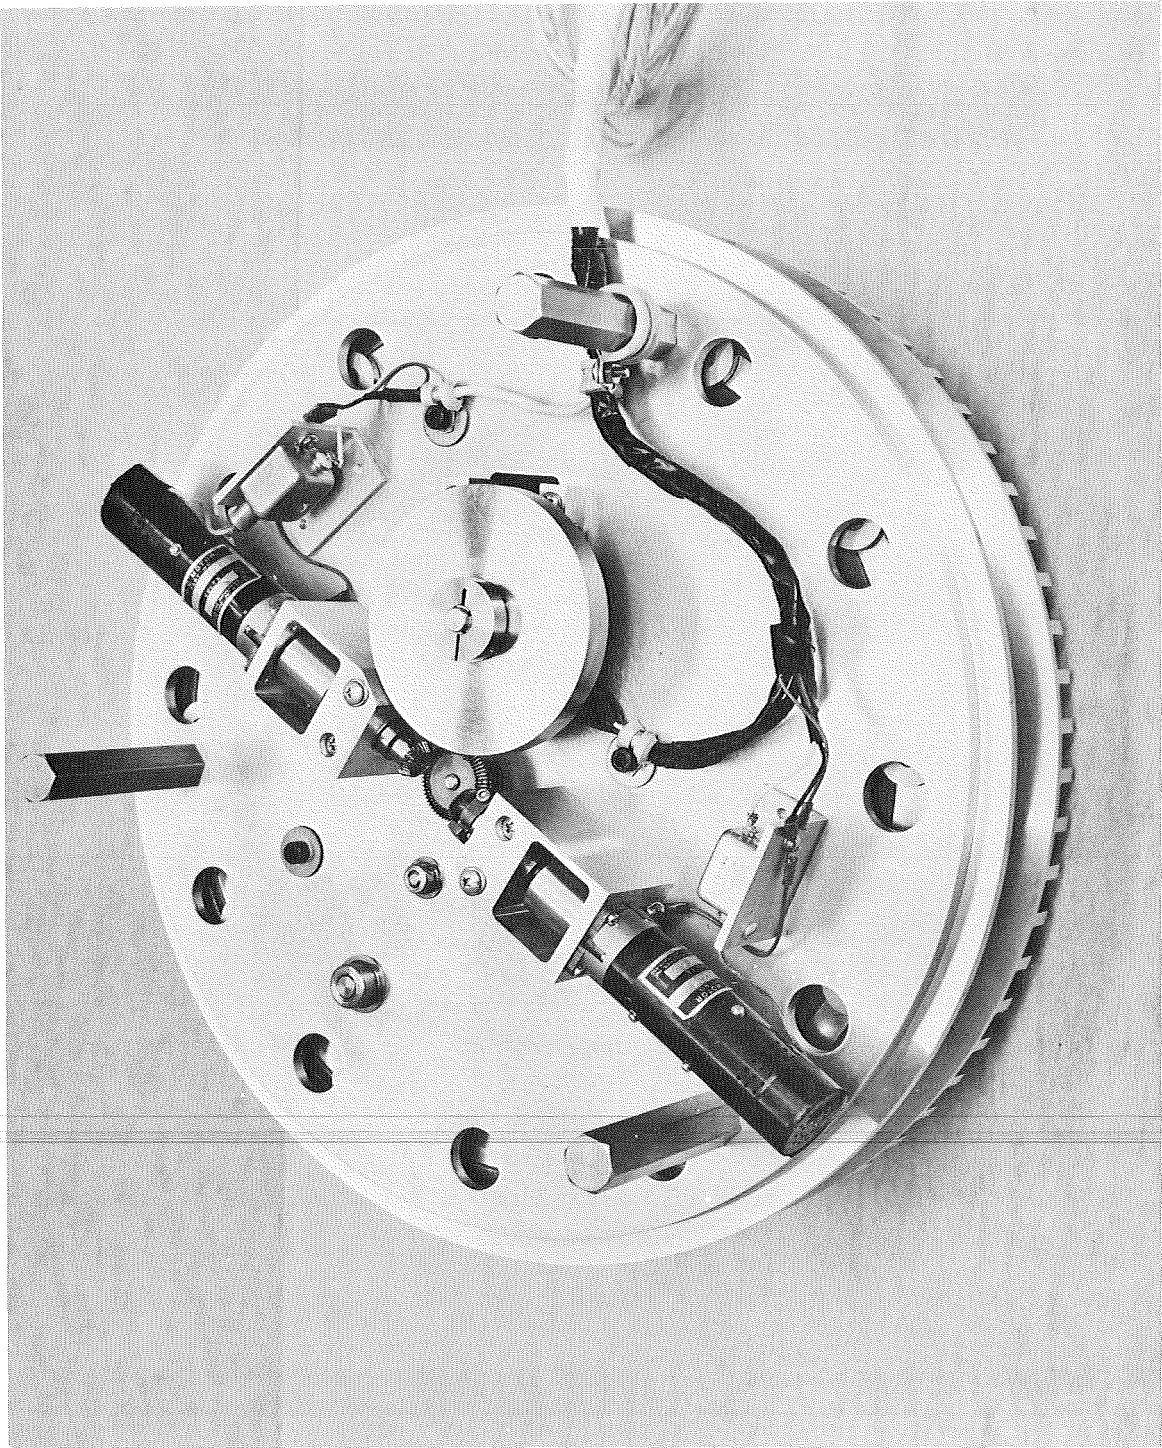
Bottom View of Feeder Mechanism Assembled
